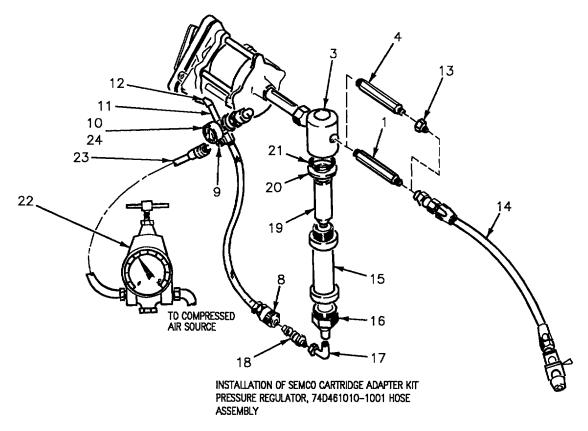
Pneumatic Sealant Injection Gun, Preparation (Sheet 1)
